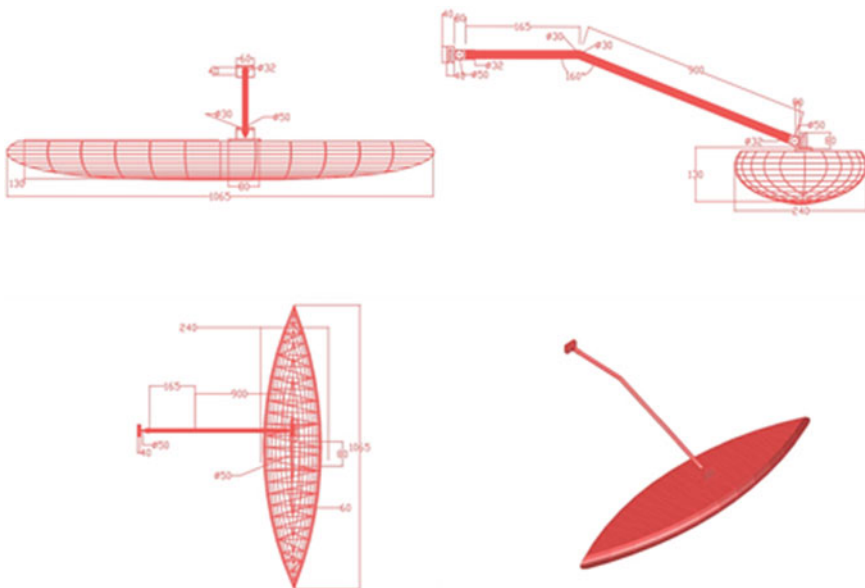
The detail drawing of outrigger stabilizer with adjustable arm
